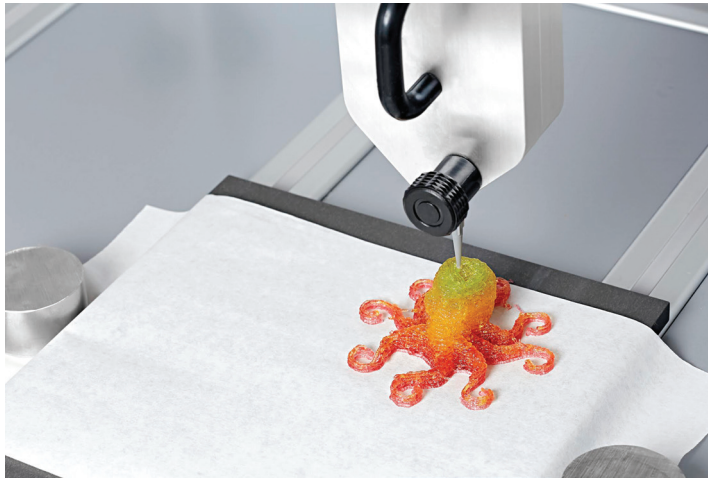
3D printed gummy octopus using syringe-style extrusion.
